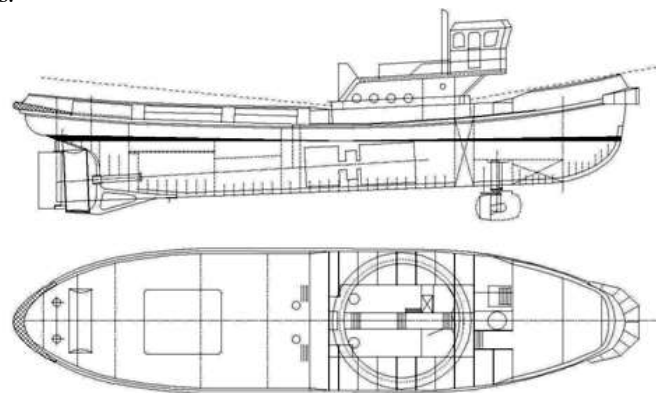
Arrangement of the Combi Multratug 12 tugboat, equipped with a carousel towing system
